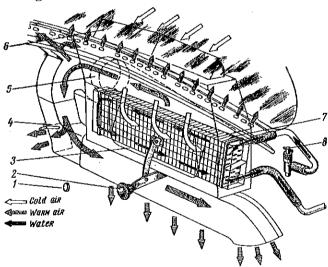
Body Heating and Ventilation and Windshield Defrosting:
